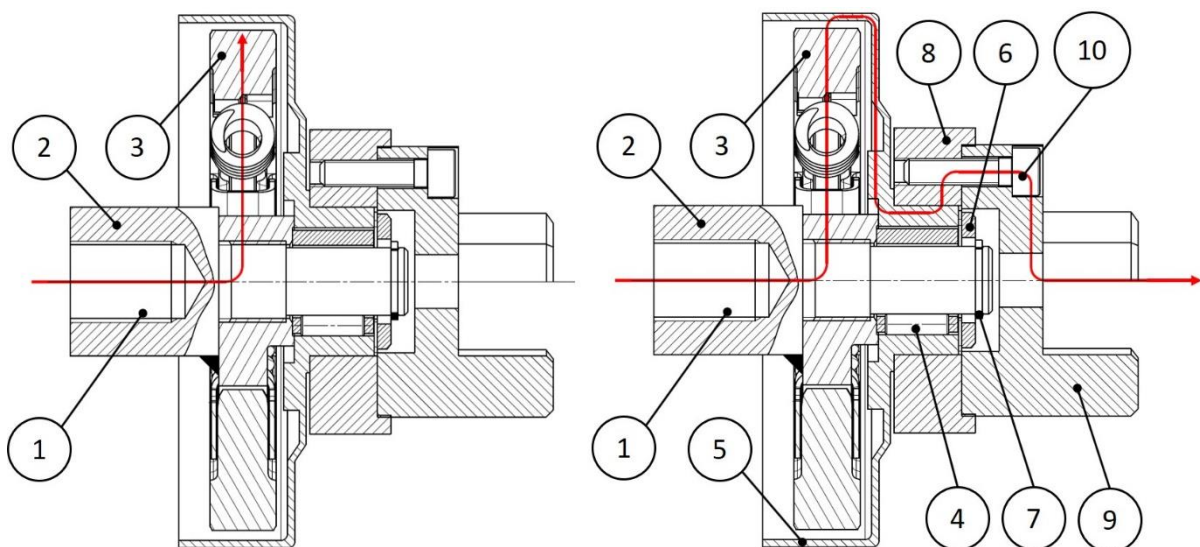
Sectional drawing of the clutch assembly including the torque flow
